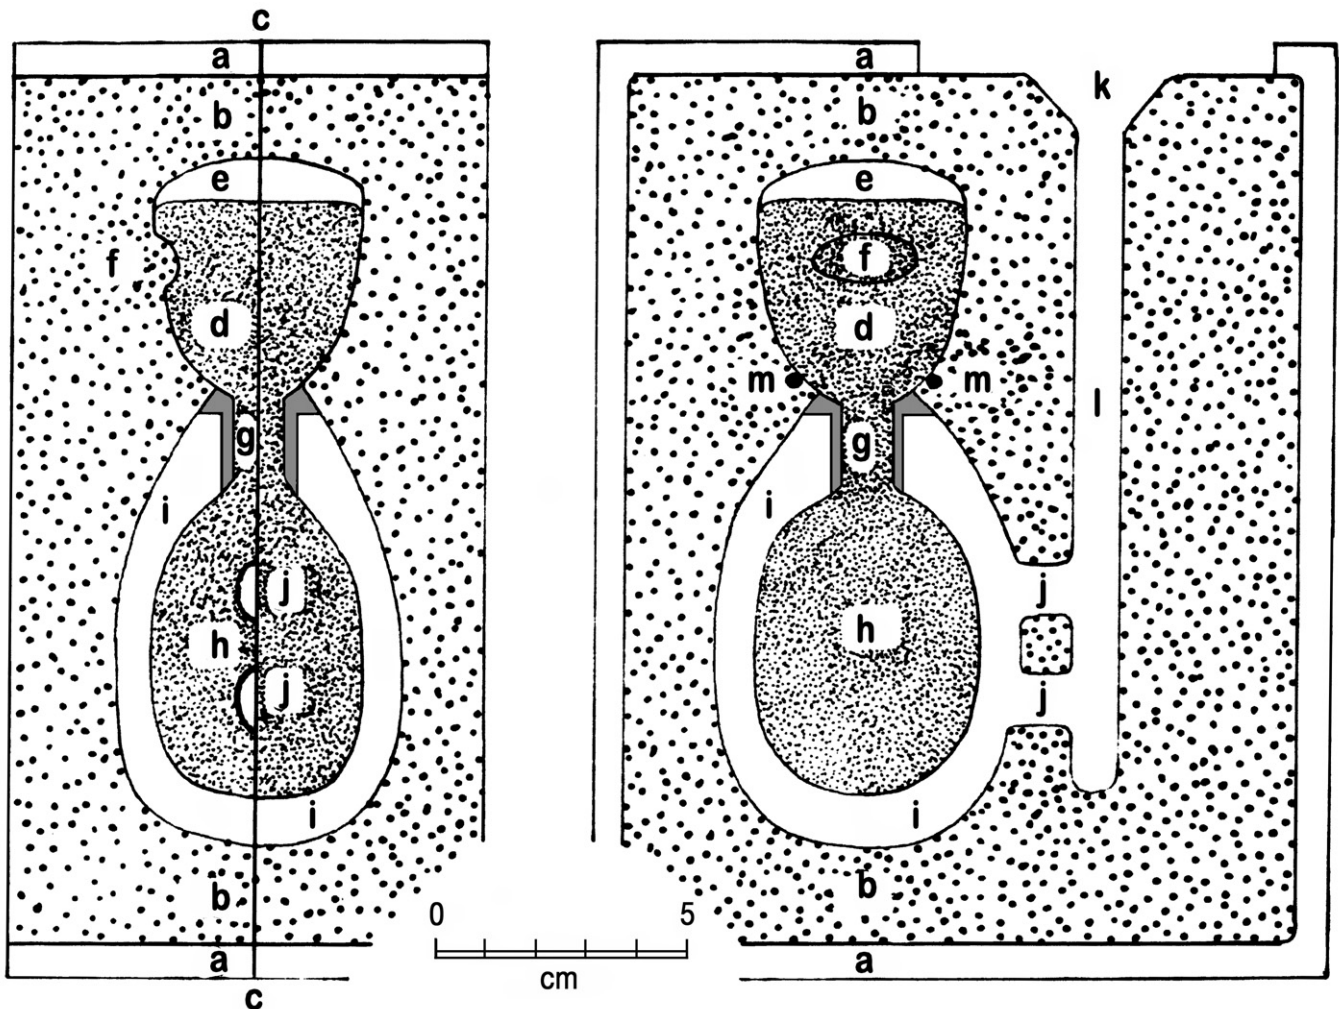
Probable mould layout; in practice the mould would have been larger, with other patterns on the same runner bar. Key to the labelled parts is as follows:
